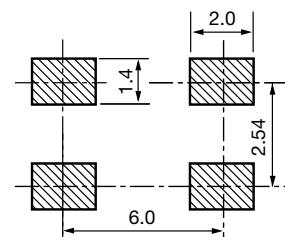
CSM-8M – Recommended Solder Pad Layout, Top view
